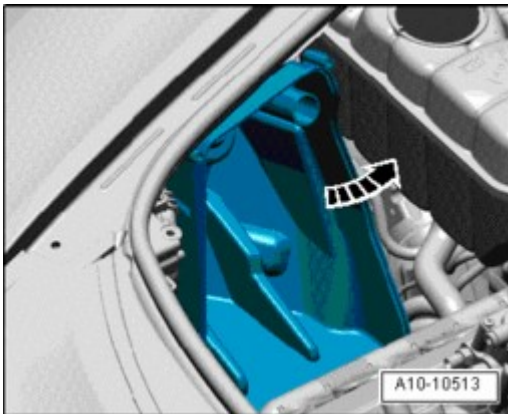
Tilting Upper Part Of Air Filter Housing Up/Out
